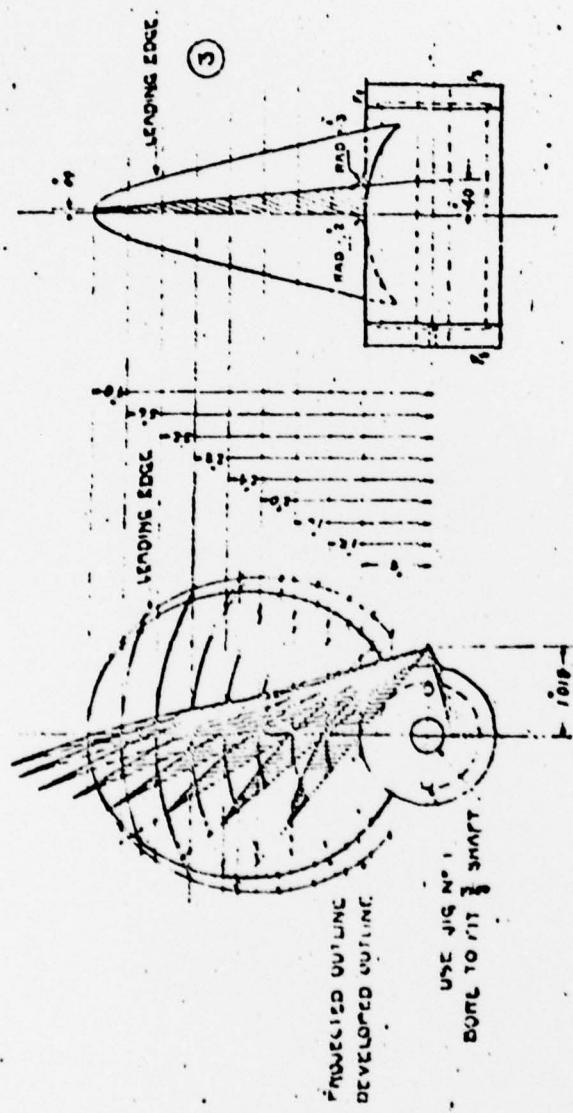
Drawing for Propeller 828 - P/D = 0.8
